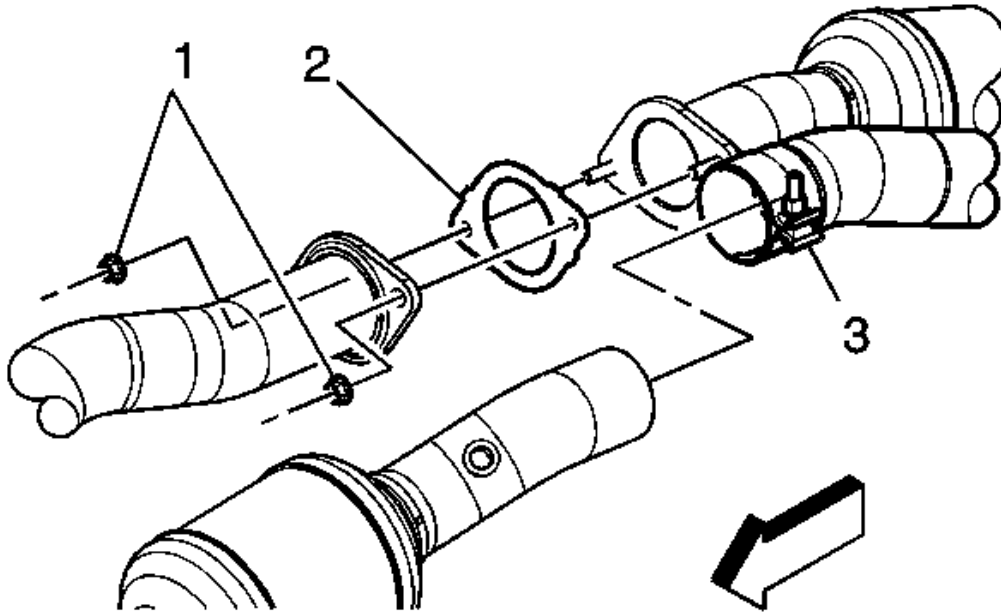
View Of Exhaust Muffler, Exhaust Manifold Pipe, Gasket & Nuts
